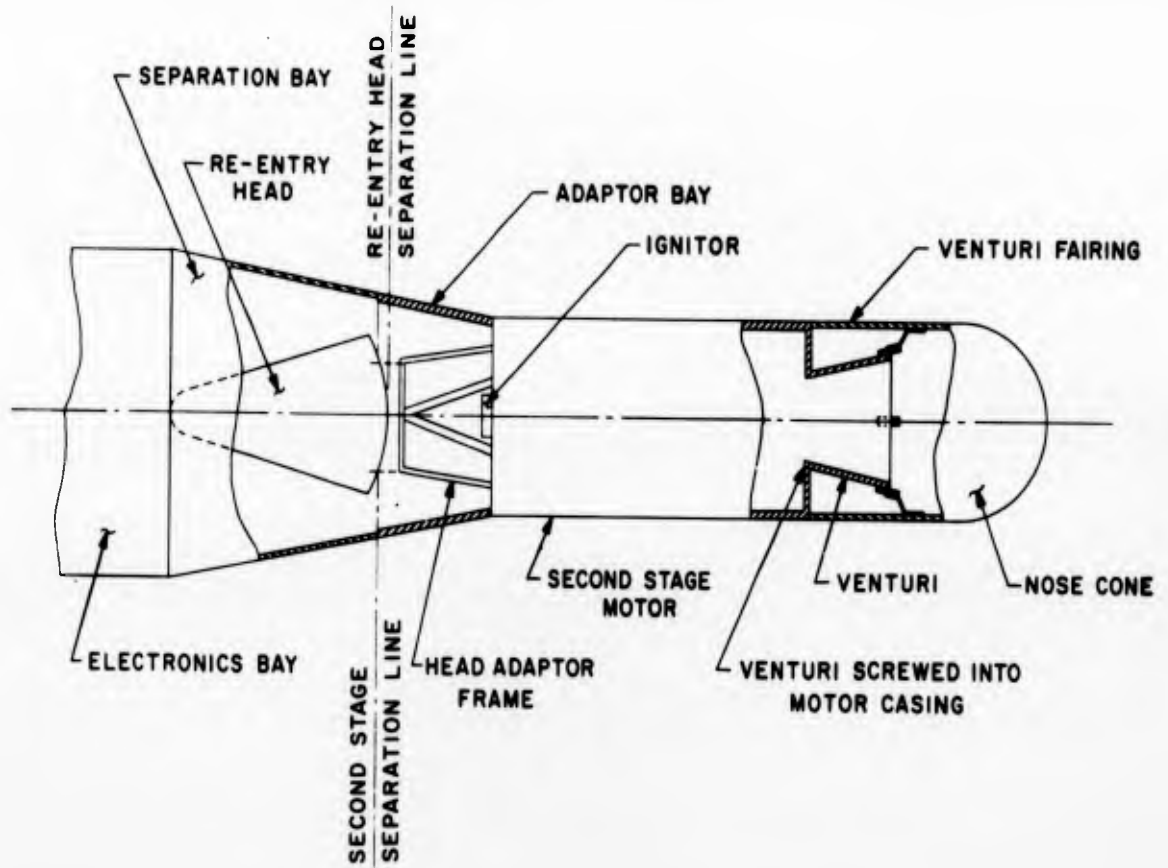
SECOND STAGE CUCKOO MOTOR AND RE-ENTRY HEAD ASSEMBLY
